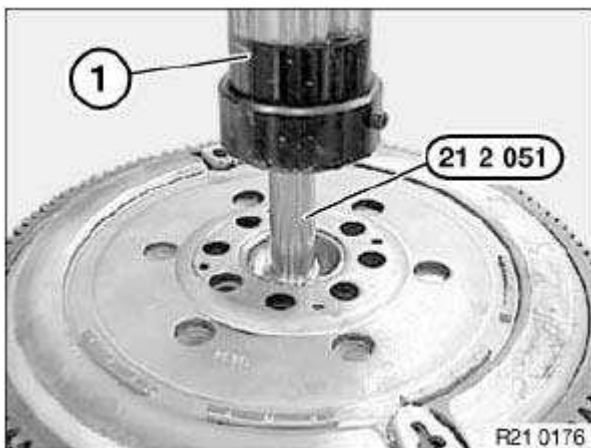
Hydraulic Press And Special Tool (21 2 051)
